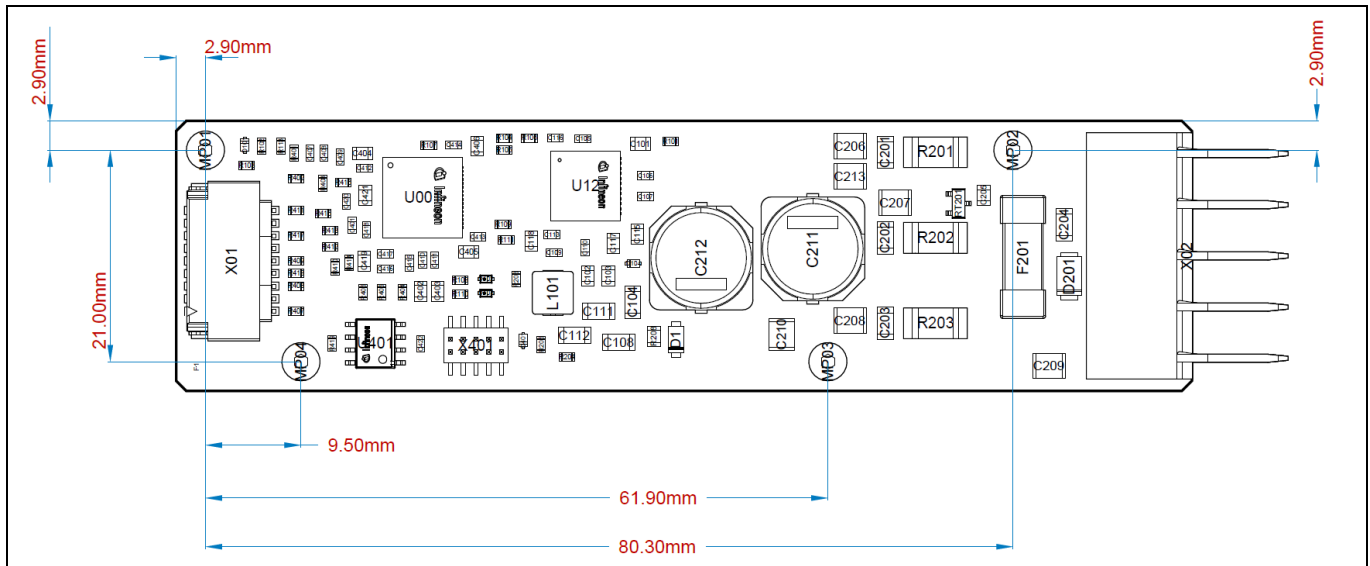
PCB mounting screws pattern drawing (M2 threading)
